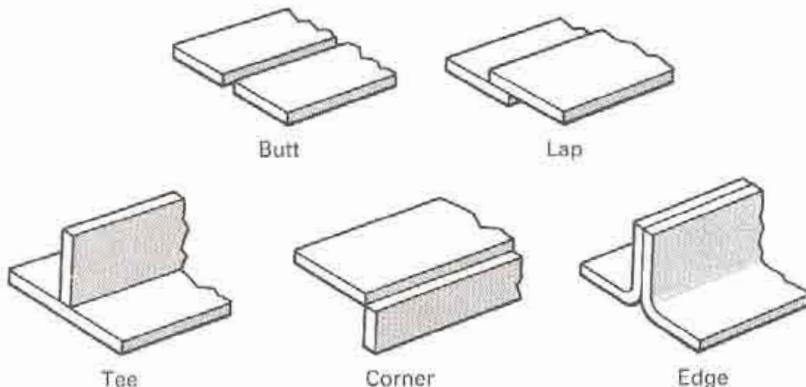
Five basic joint designs for fusion welding.
